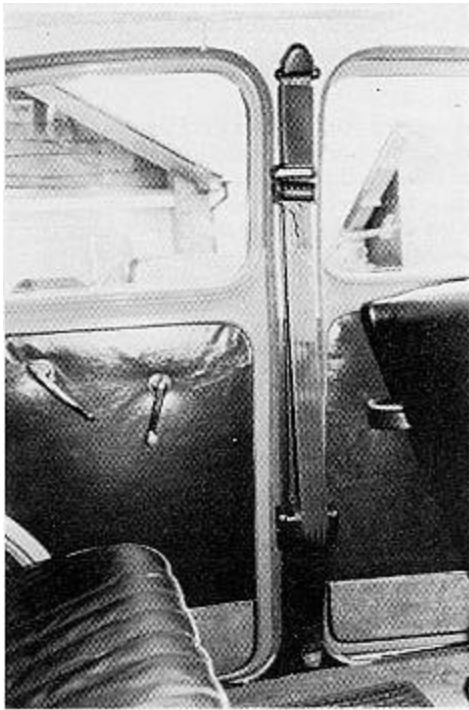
(above) shows clearly how the top bracket is fixed. The trim needs to be drilled for the fixing bolts and this needs to be accurate. This is achieved by putting the bolt into the hole and then painting a small circle on the bolt head. The trim is then held in place and just flicked onto the bolt head. This gives you the precise position marked on the back of the trim. Repeat this for the lower fixings. Take great care over this, otherwise the trim will not line up. Incidentally, if your seats can be easily removed then do so and the whole job becomes a lot easier.
